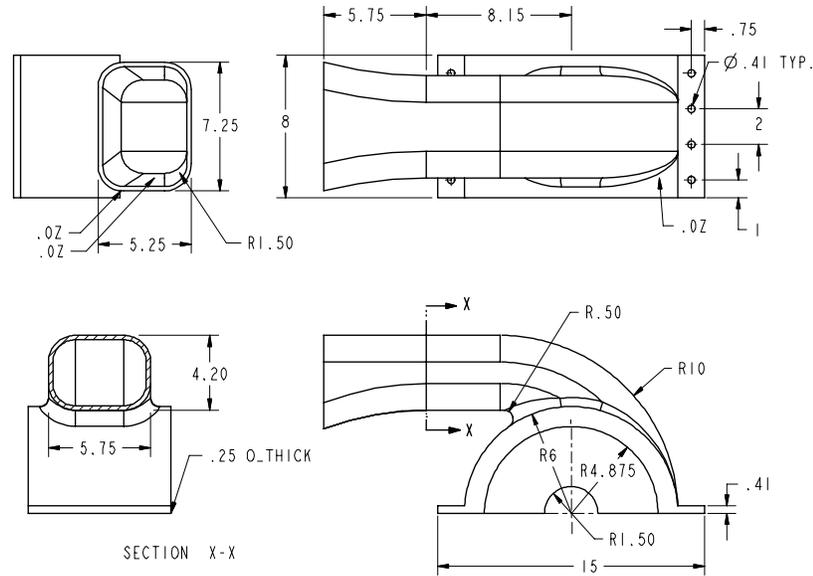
Left-side view of the top view, top view, front view, and the sectioned left-side view of the model
